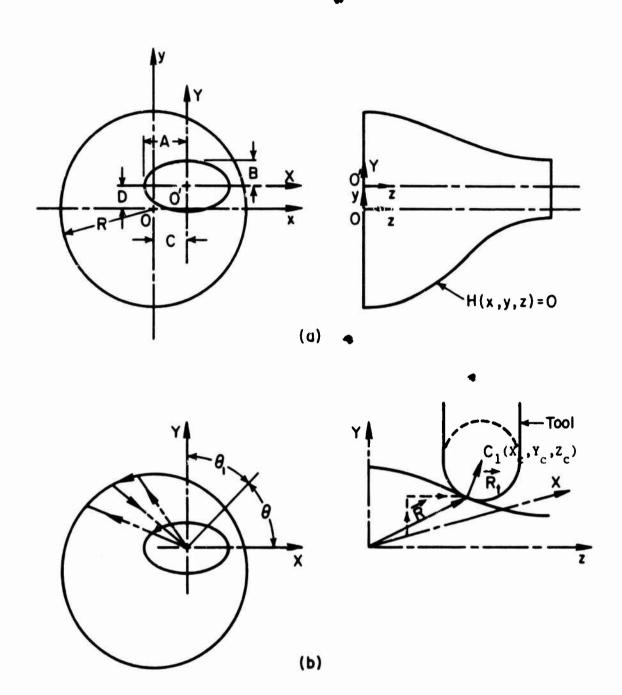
NC MACHINING OF THE ELECTRODE TO EDM THE EXTRUSION DIE
